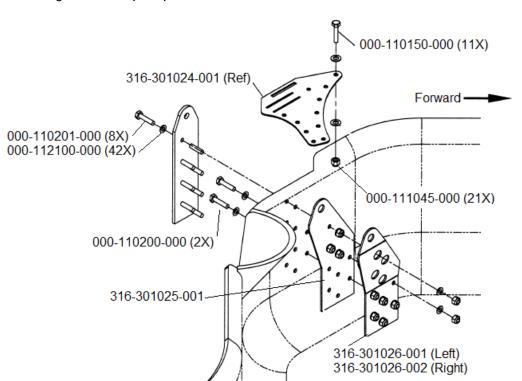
Detail C (2 of 2) Sta. 232.48, L2
